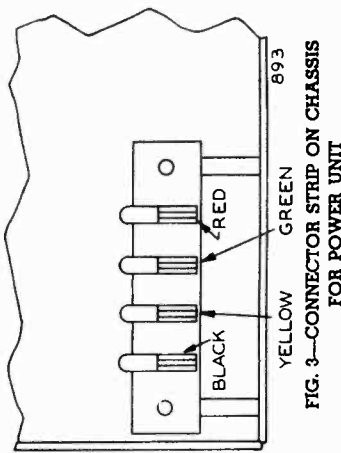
CONNECTOR STRIP ON CHASSIS FOR POWER UNIT
